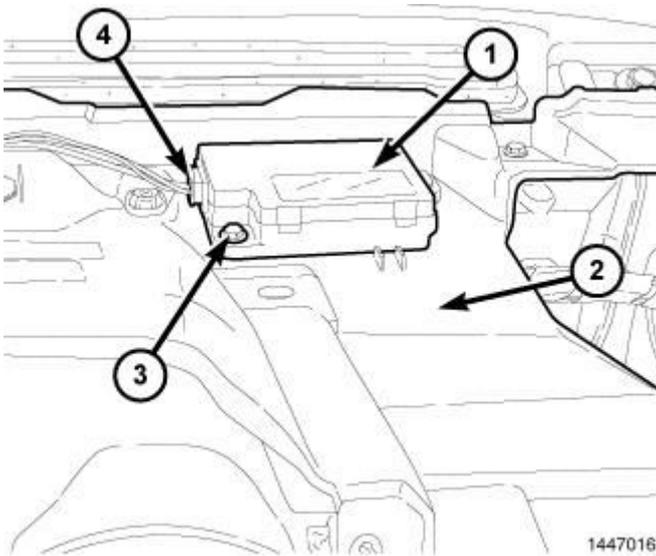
Identifying Remote Compass Module (RCM), Instrument Panel, Screws & Electrical Connector
